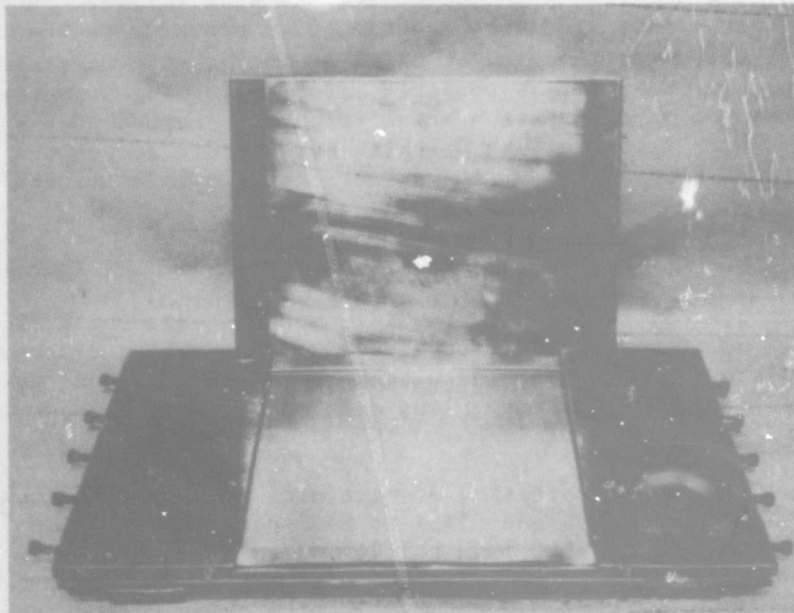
BEND-STRETCH FIXTURE SPECIALLY DESIGNED FOR CONTOURING THE CURVED HEATSHIELD INNER SKINS HELD IN TOOLING READY FOR FORMING ON PRESS BRAKE
